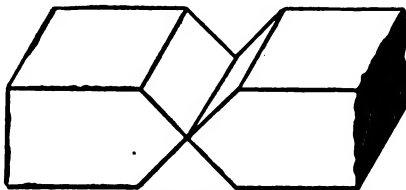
Preparation of Heavy Forgings for Welding
